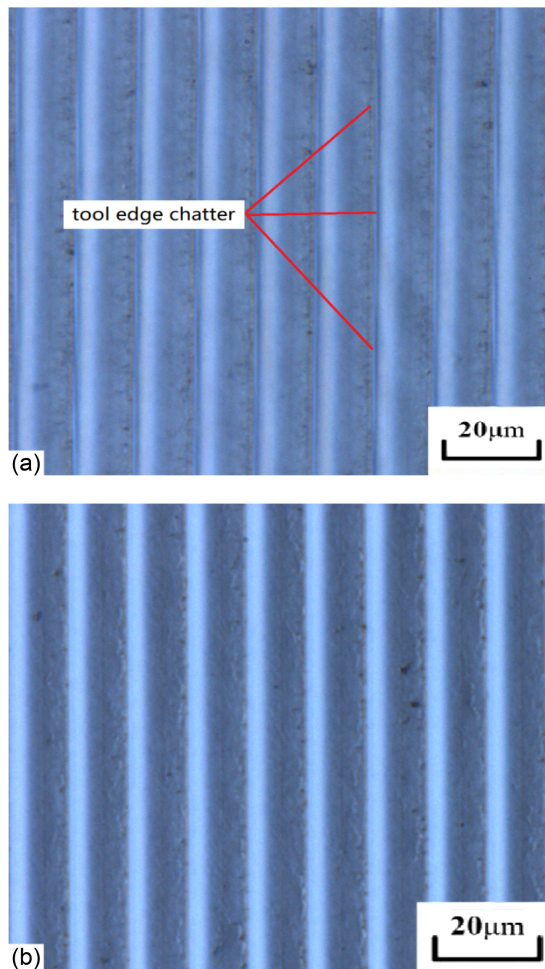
Grating images under a high-power objective lens: (a) original cross-spring ruling tool carrier and (b) optimized ruling tool carrier.
